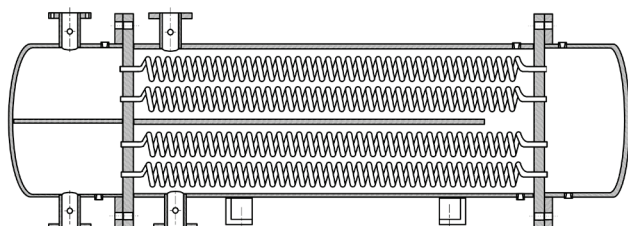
Shell and tube heat exchanger with parallel helical tube coils - fixed tube sheet type
